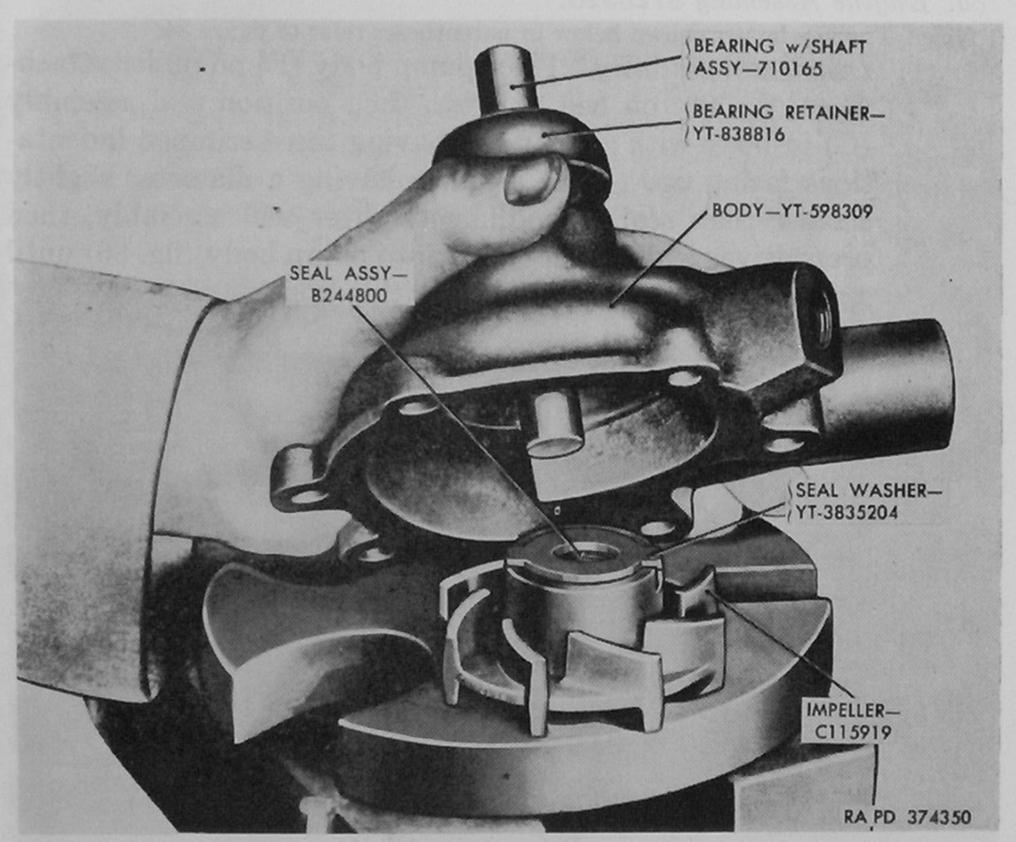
Positioning water pump body and bearing with shaft over impeller—engine assemblies 7411599 and 8329440.
